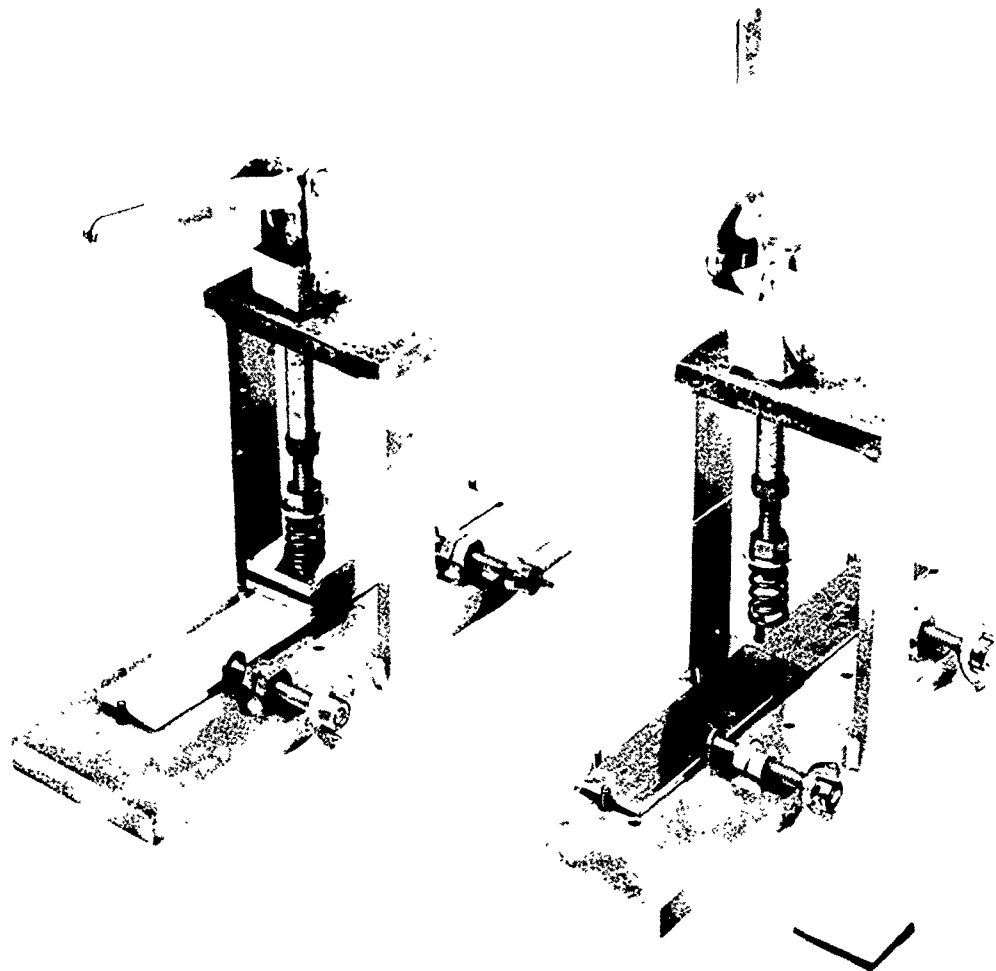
Fixtures Used for Adhesive Bonding Tensile Shear Specimens
